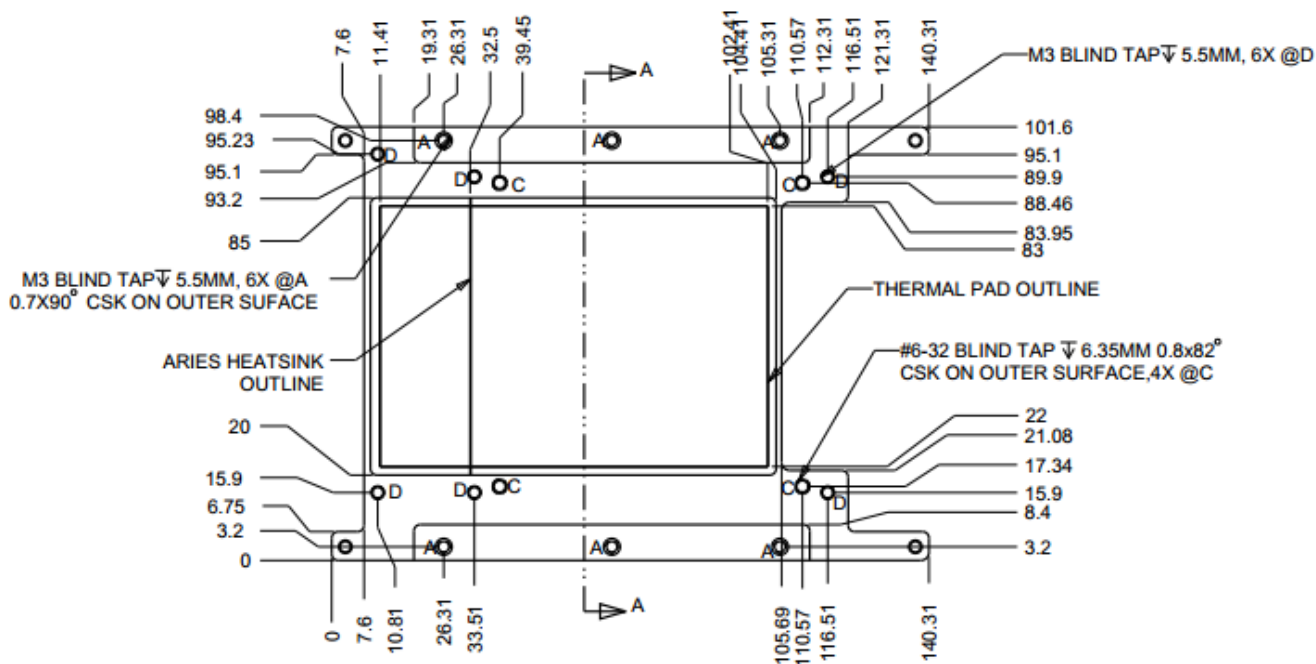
Mechanical Drawing of the Heat Spreader (Bottom View)
